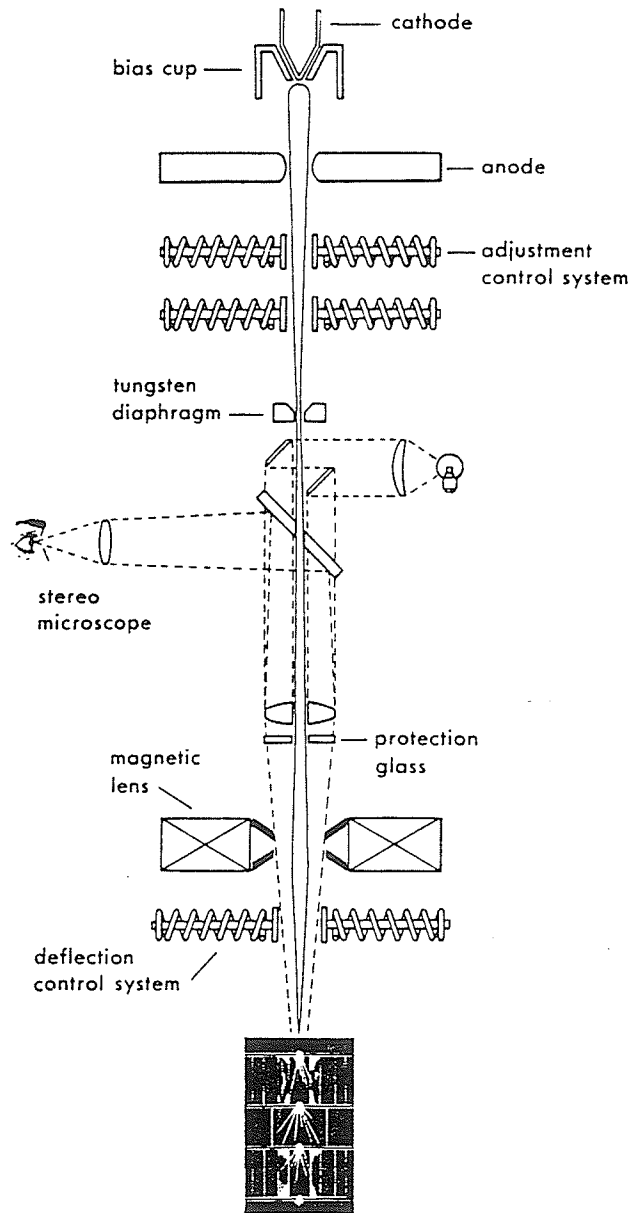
Schematic representation of electron beam welding [17].
